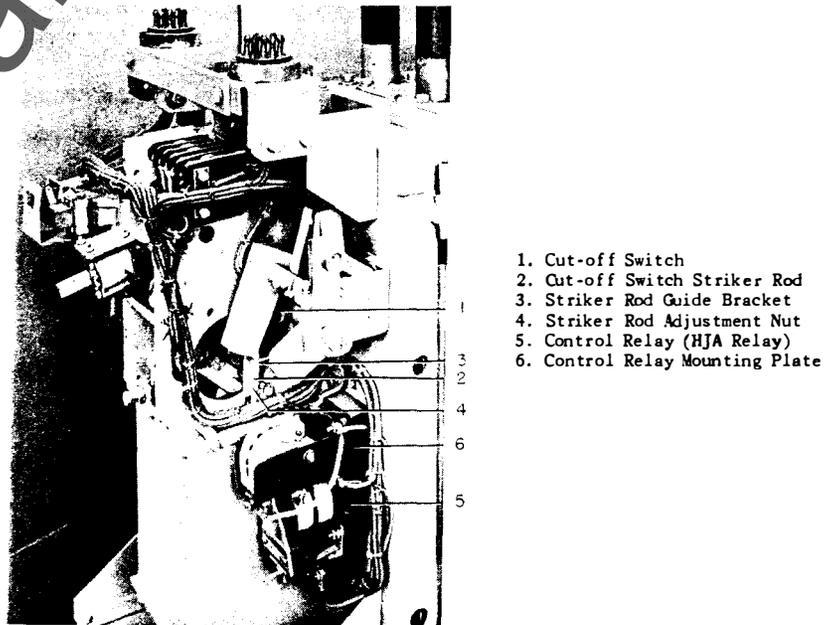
Side View of Control Relay and Cut-off Switch Assembly
